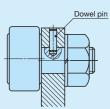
Mounting examples of Solid Eccentric Stud Type Cam Followers
